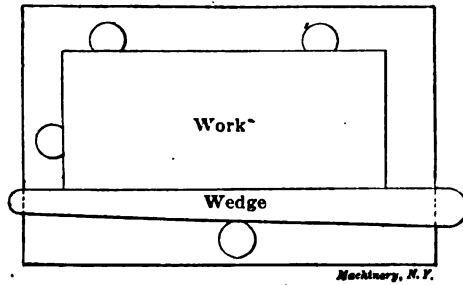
Wedge Acting as Clamp in Drill Jig.
